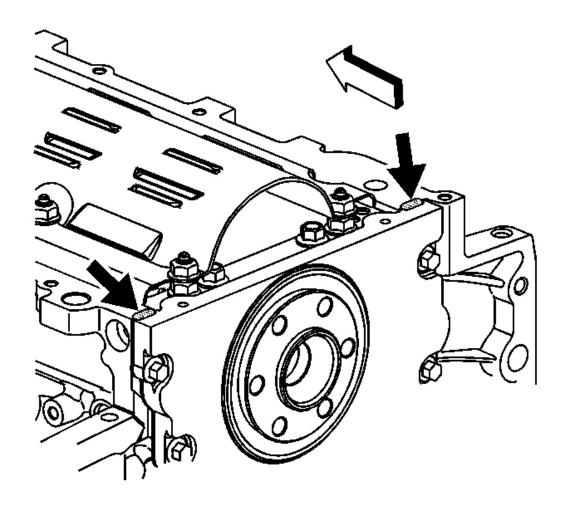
View Of Sealant On Engine Rear Cover Gasket Tabs Courtesy of GENERAL MOTORS CORP.
